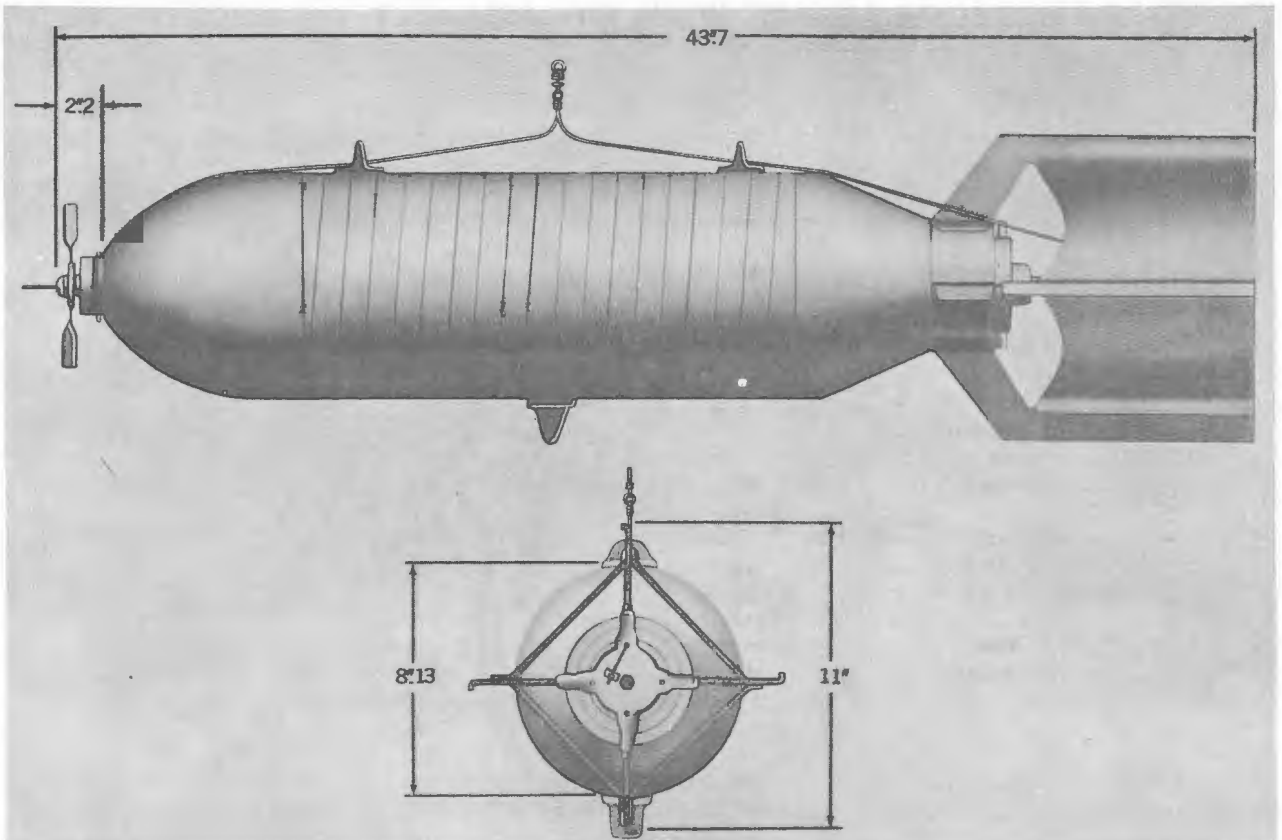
260-lb Frag Bomb AN-M81 with Fin Assembly AN-M103A1, Exterior View.
